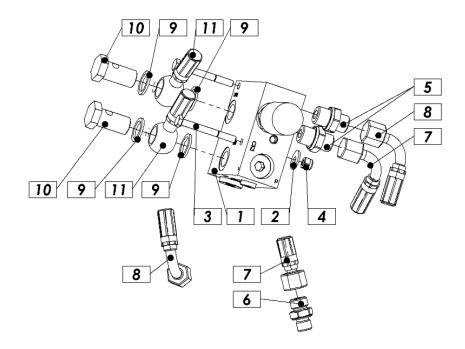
4006.32.20.0 – Unwinding speed adjustment valve 45Hpro.
